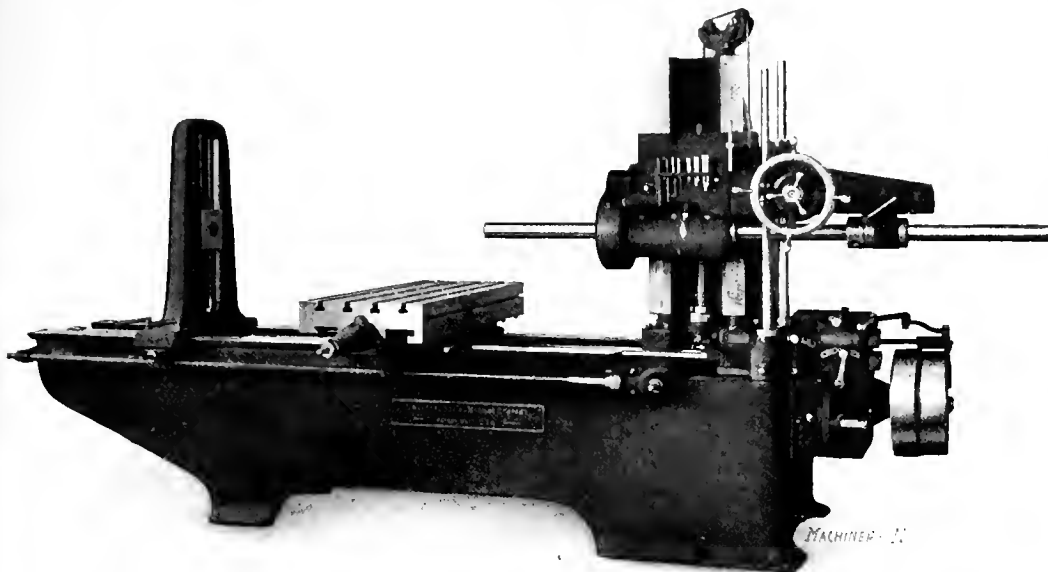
Universal Boring Machine Co.'s Horizontal Boring Machine
